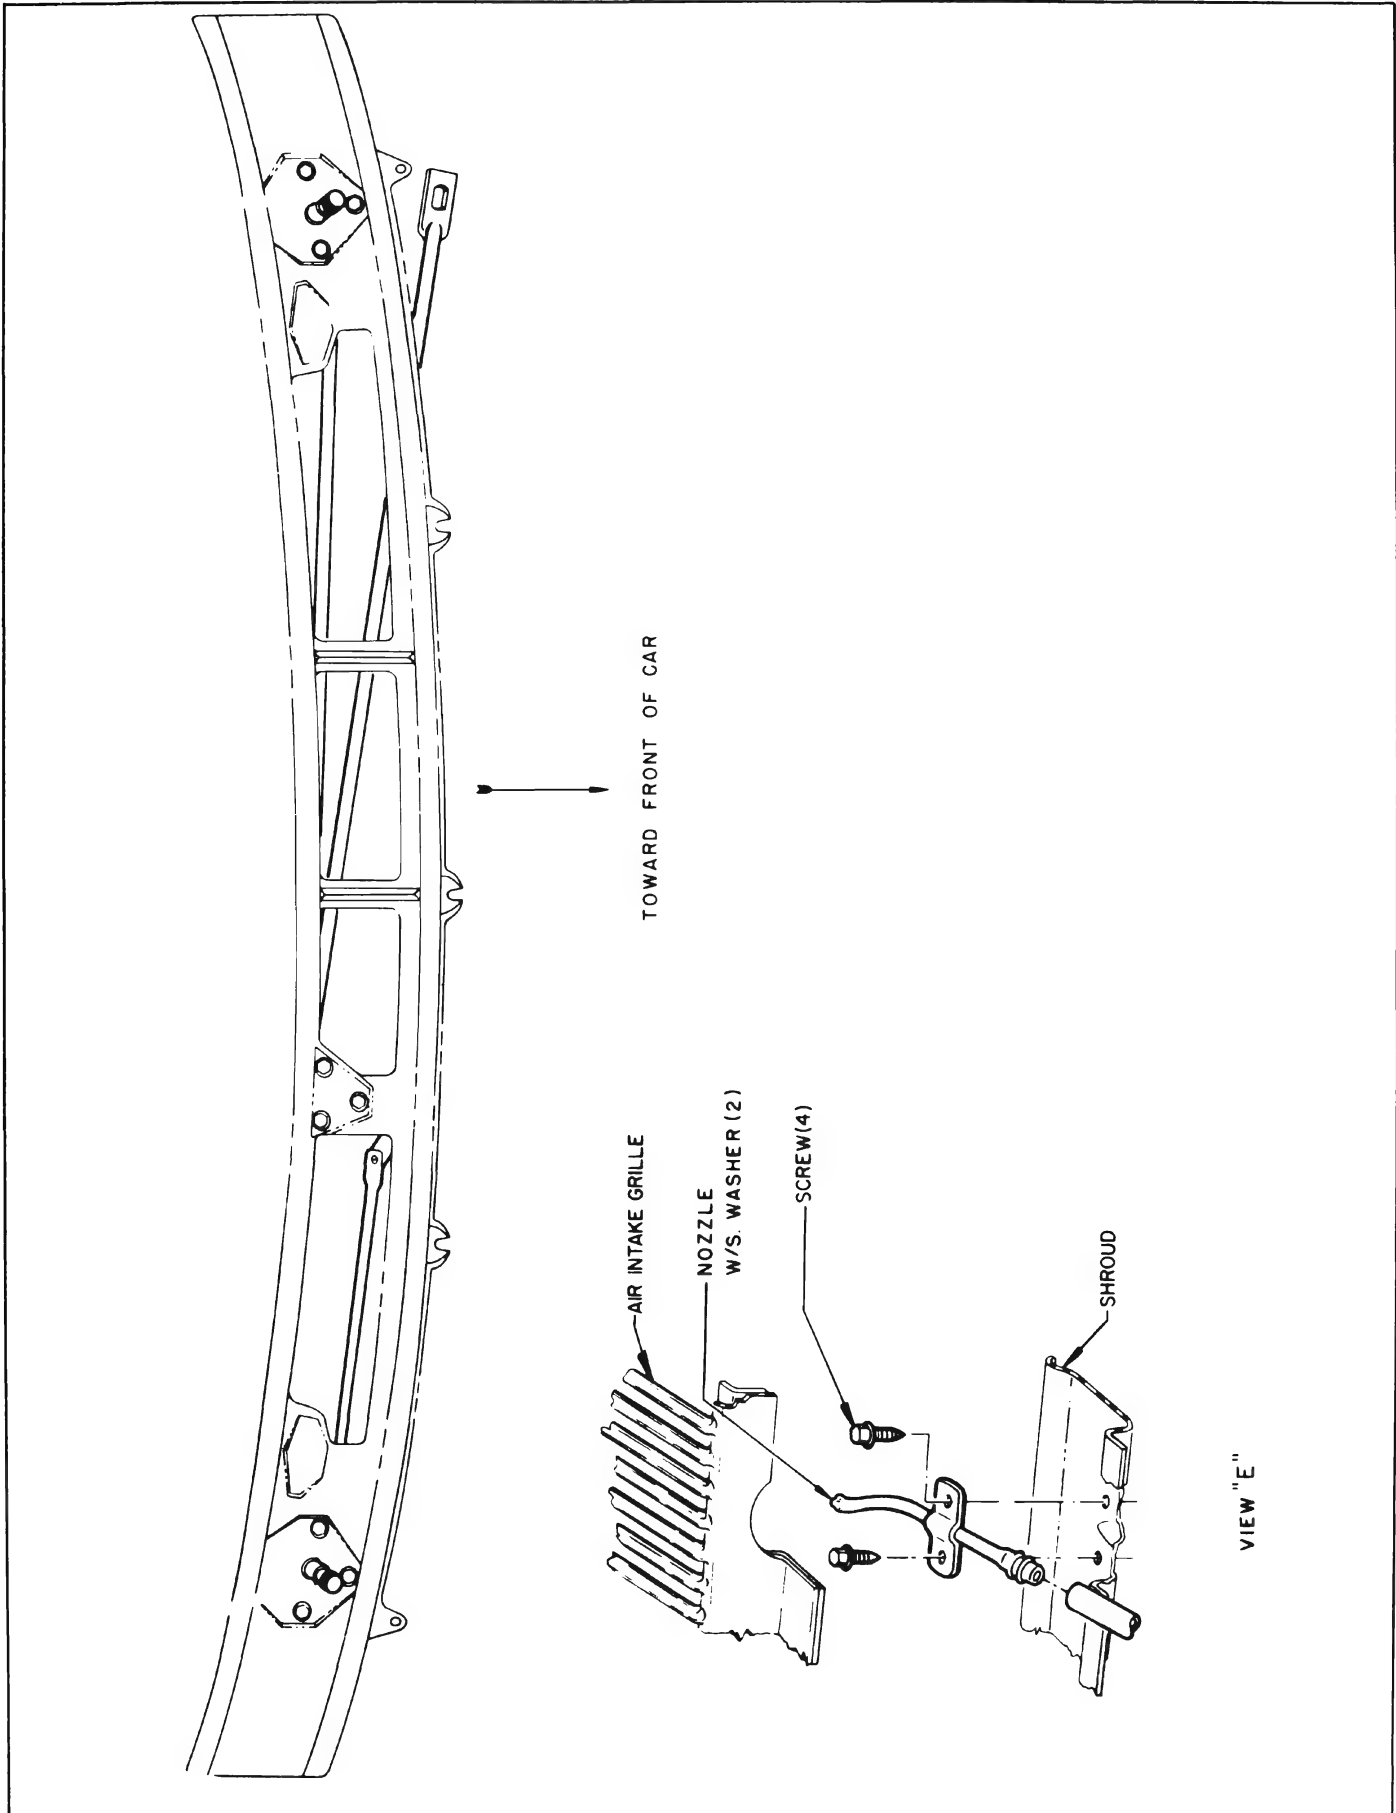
Windshield Wiper Linkage and Washer Nozzle Mounting
